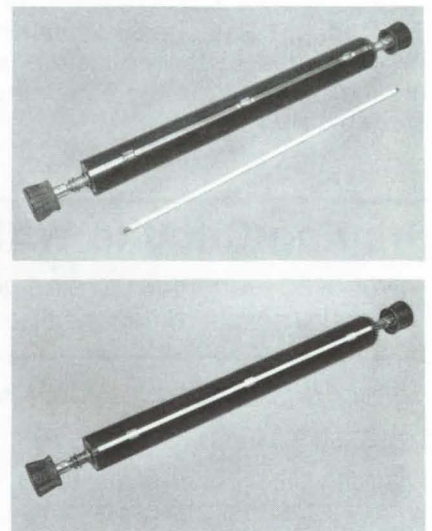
Tubing To Be Coded is slipped over a nylon rod (above) and then is inserted into a groove cut into the typewriter platen. Grooves of varying diameter can be cut into the platen (below) for additional sizes of shrink tubing.
